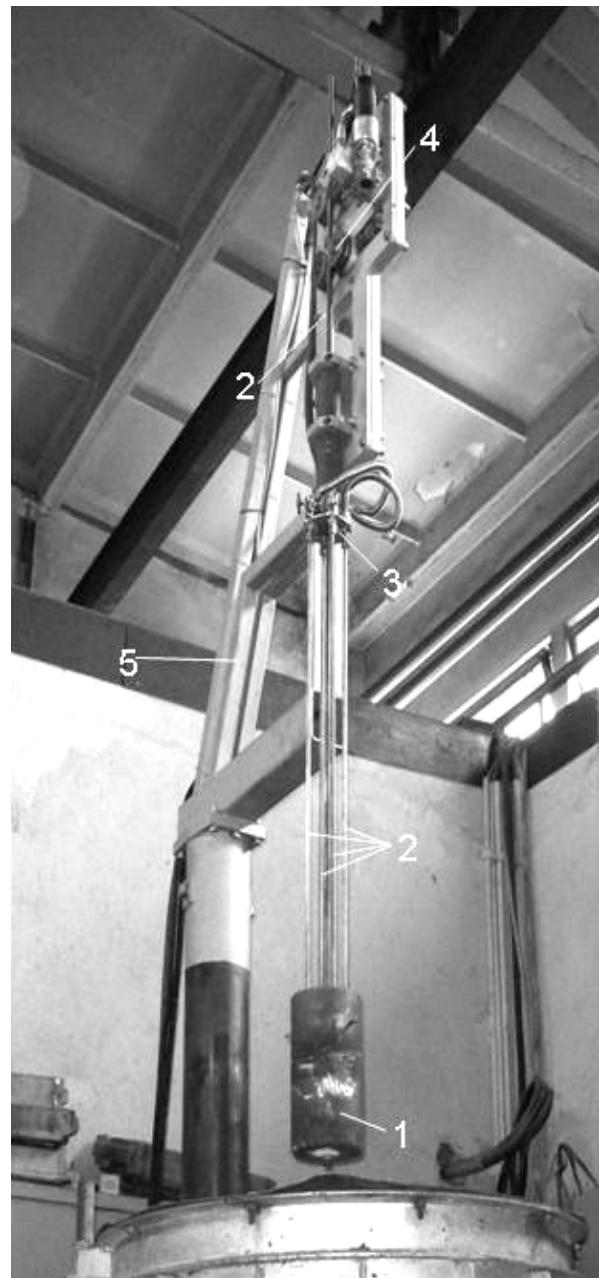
Mould for upwards continuous casting of metals and drawing mechanism installed on support frame: 1-working head (graphite-fireclay cup) with graphite casting die; 2-supply pipes (the support body 2, Fig. 4, is not shown); 3-collector; 4-drawing mechanism; 5-support frame; 21-cast aluminium wire.
